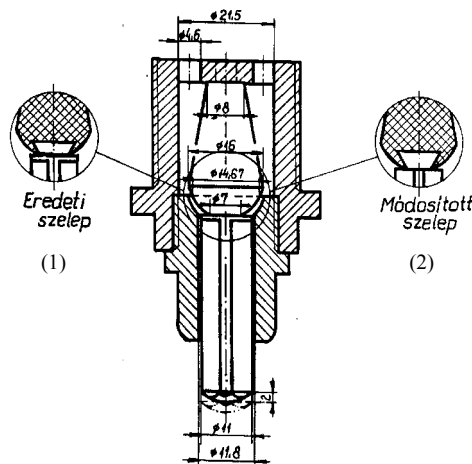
Rubber spring valve of self drinker type SZI original valve stem(1), modified valve stem(2)
